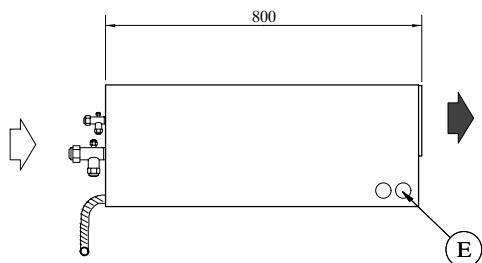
Overall dimensions / Dimensioni di ingombro
